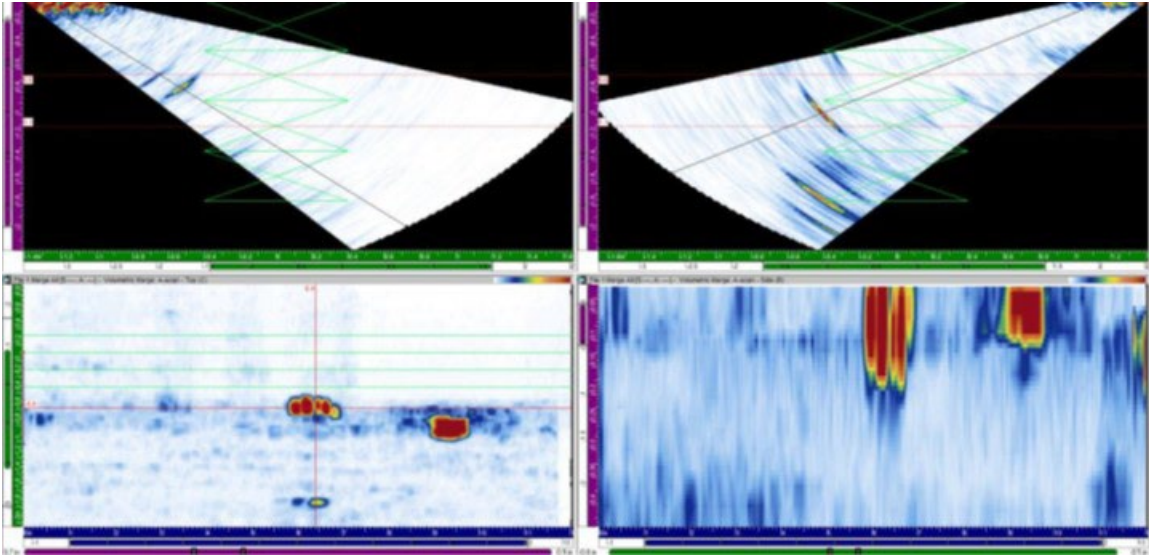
PAUT results showing flaw indications in the MG-6 butt weld test panel
